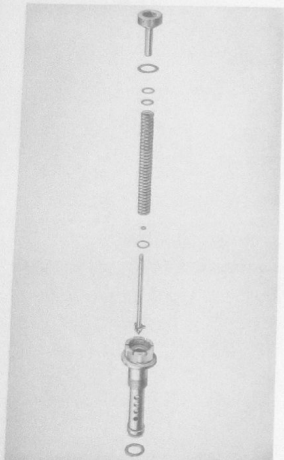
Assembling High Pressure Relief Valve Assembly—Composite View
